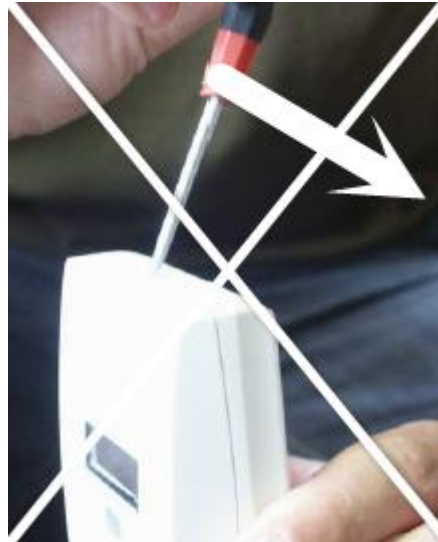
Closed housing seen from the side. Never push to the right. The locking hooks may break and the housing is damaged
